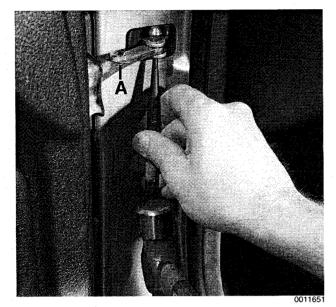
Door hinge pin bolt (arrow). Top hinge shown. Also remove pin bolt from lower hinge.
